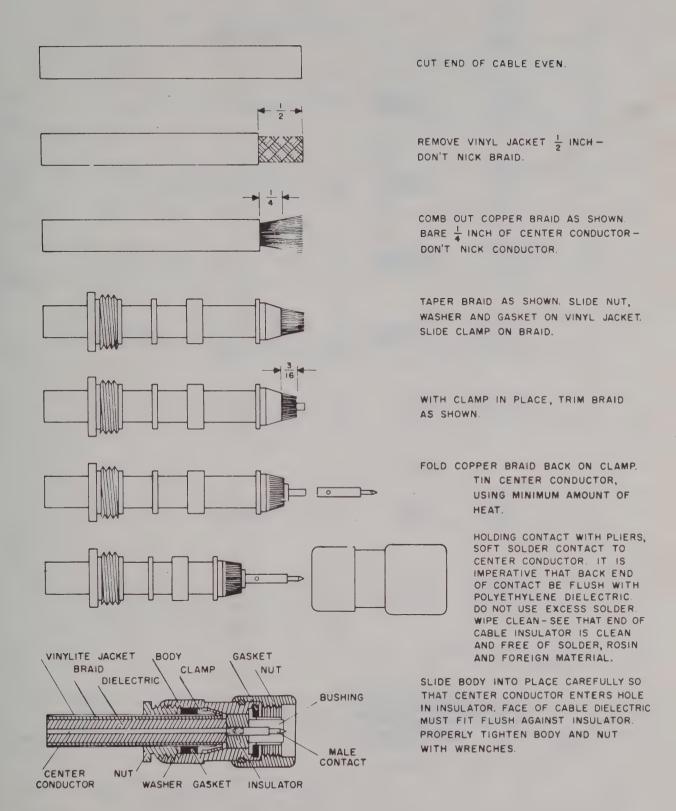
Assembly of Connector UG-21B/U to Coaxial Cable
